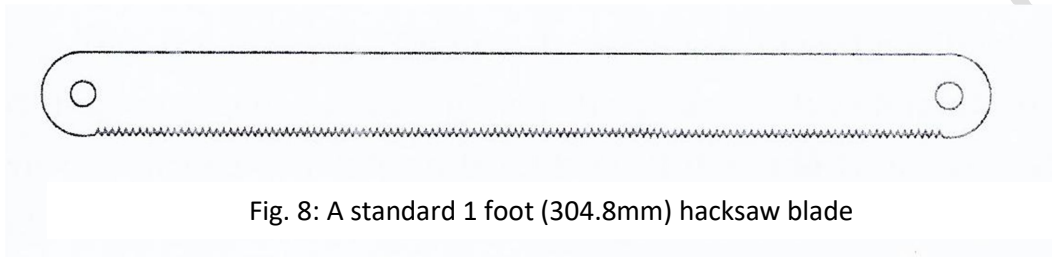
A standard 1 foot (304.8mm) hacksaw blade
